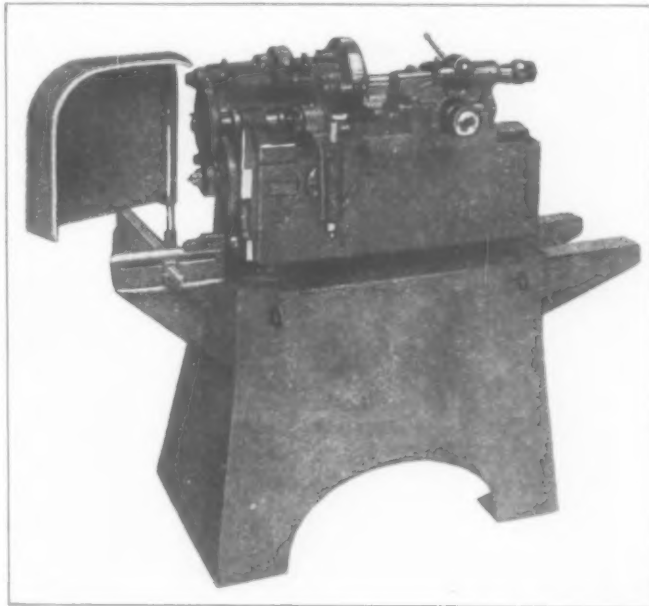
GENERAL VIEW OF PRECISION SCREW-CUTTING LATHE
